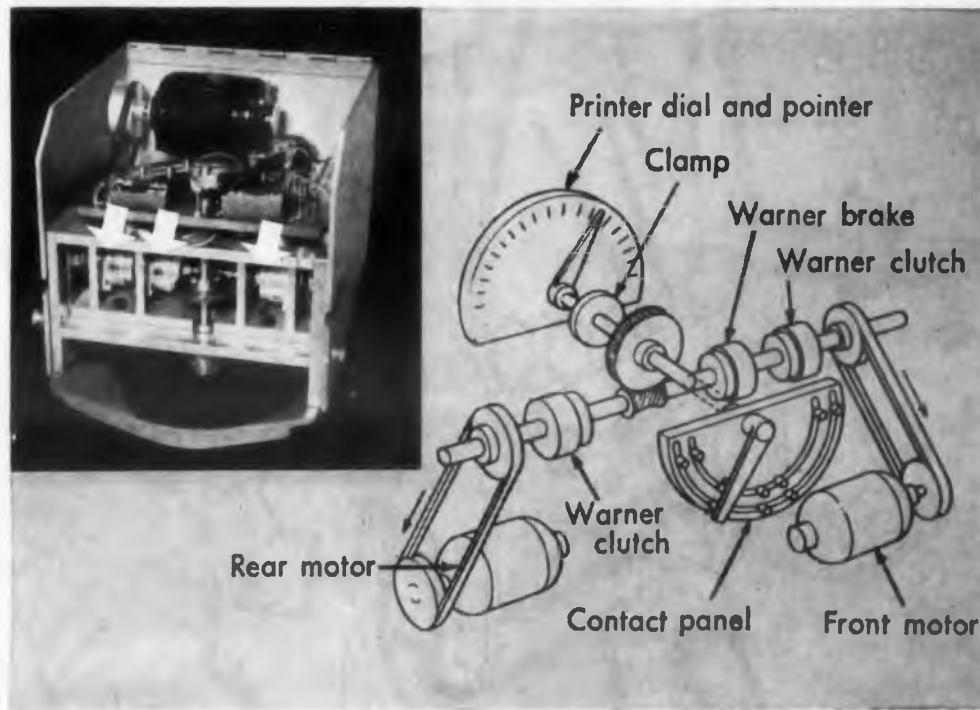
Tape-controlled servomechanism locks on printer light value selection lever, automatically sets preselected exposure. Inset of servo-unit shows compact design made possible by use of Warner electric clutch-couplings and dual motor drive.
